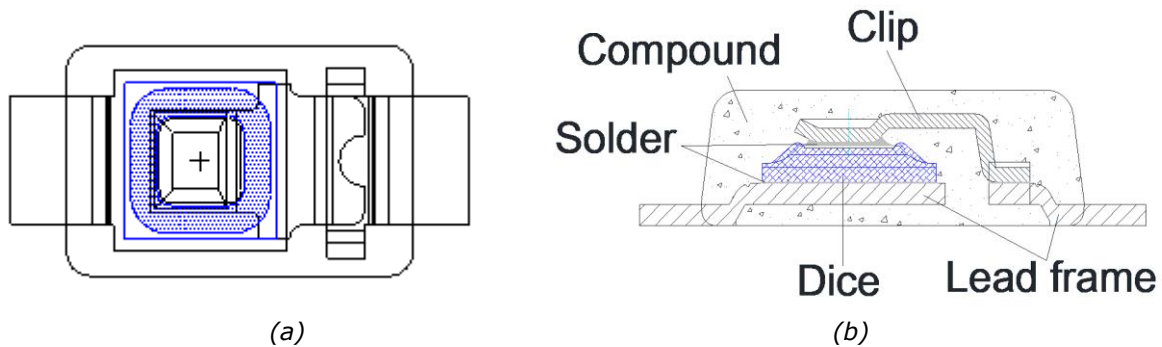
SMD series internal structure for SOD-123W. Top view (a) and side view (b) are shown here.
